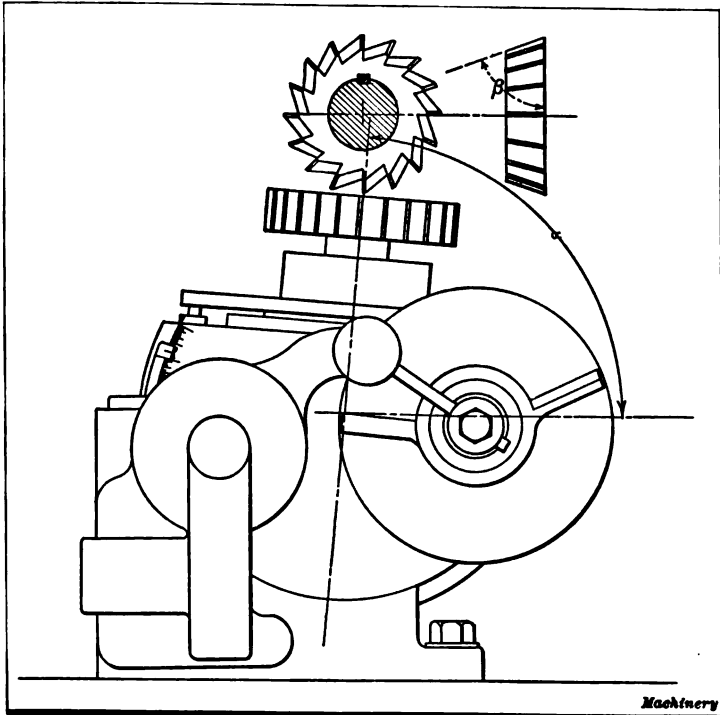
Dividing or Index Head set for Cutting Side Teeth in Side Milling Cutter
